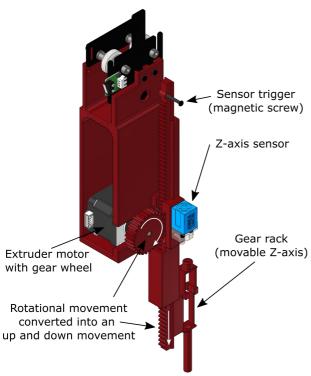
CAD drawing of the Z-axis mounting [17-20].
